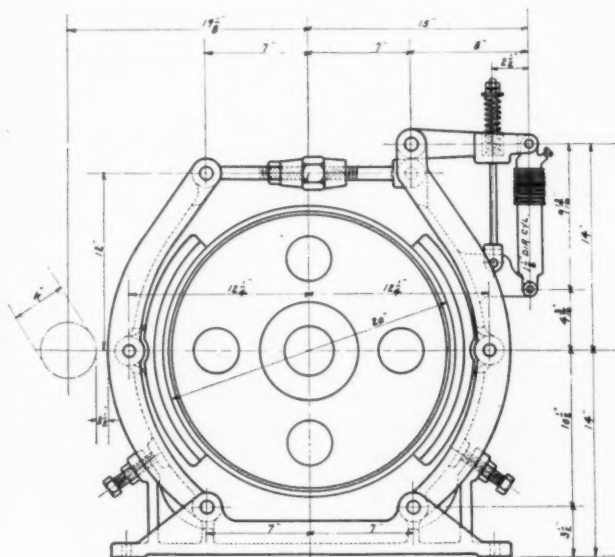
EQUALIZED 20-IN. HYDRAULIC BRAKES ARE PROVIDED FOR EACH MOTOR
